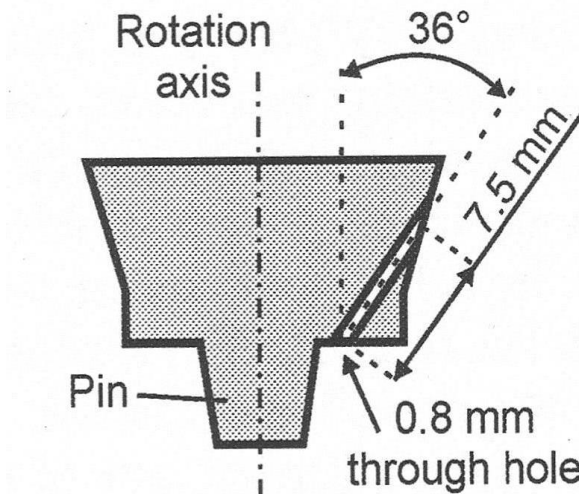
Section diagram of the thermocouple pocket in the FSW tool^[5]
